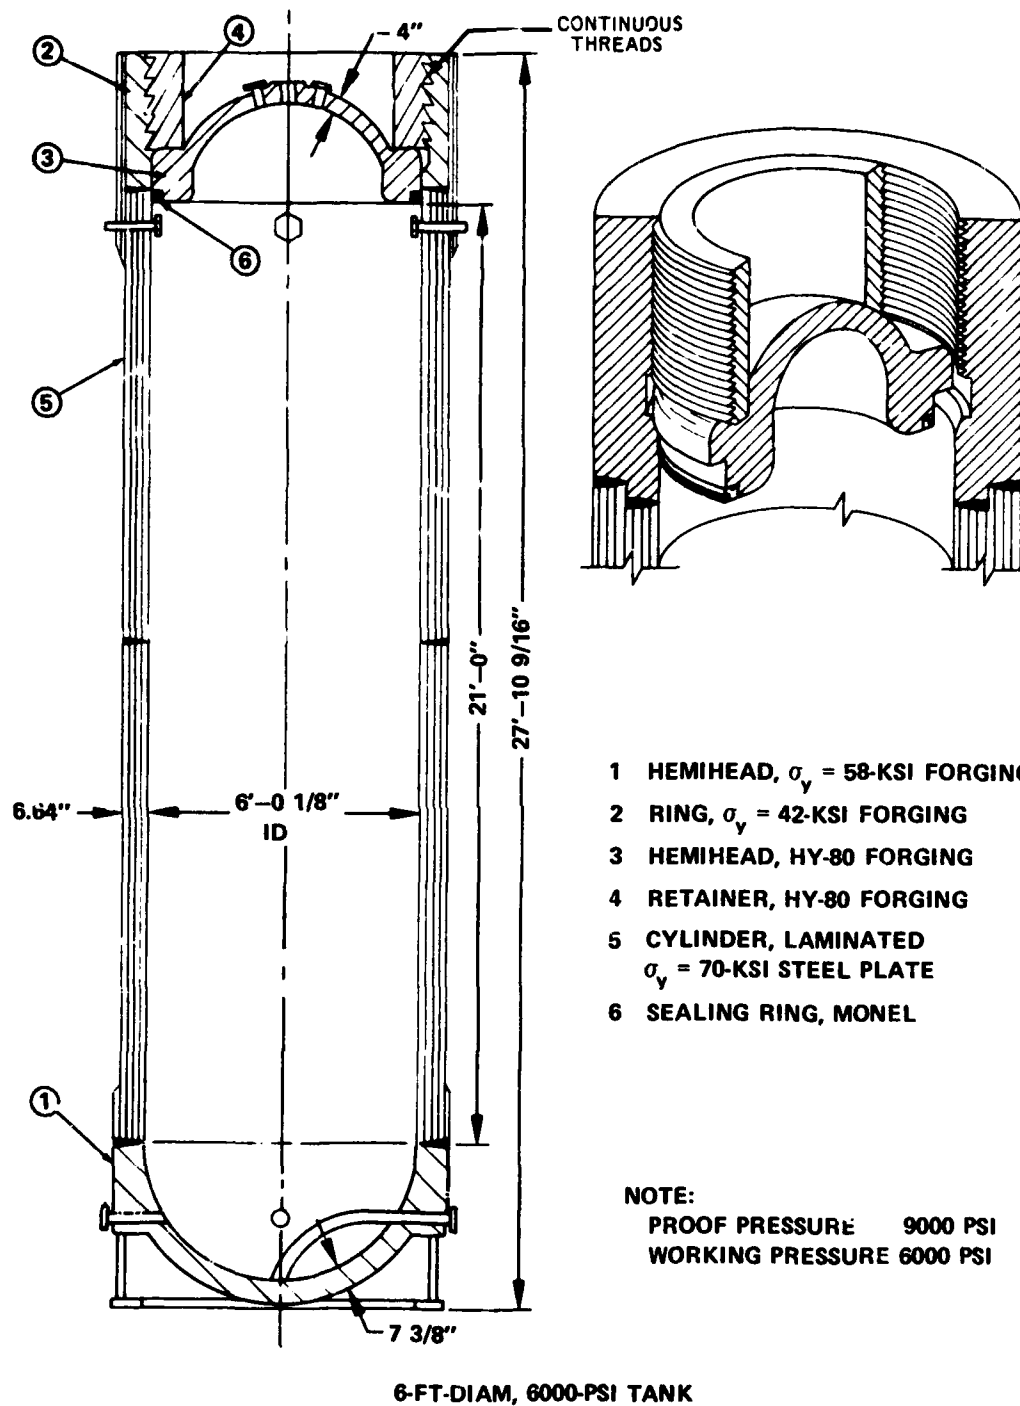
Multilayer Tank with Closure Head Secured by Threaded Plug
